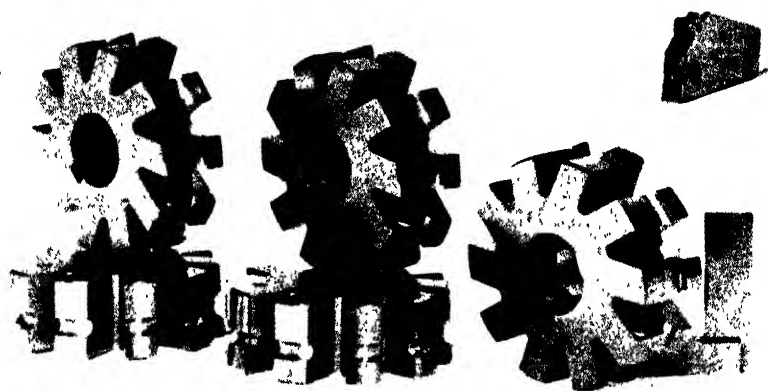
Ground form relieved milling-cutters, and part produced by them.
